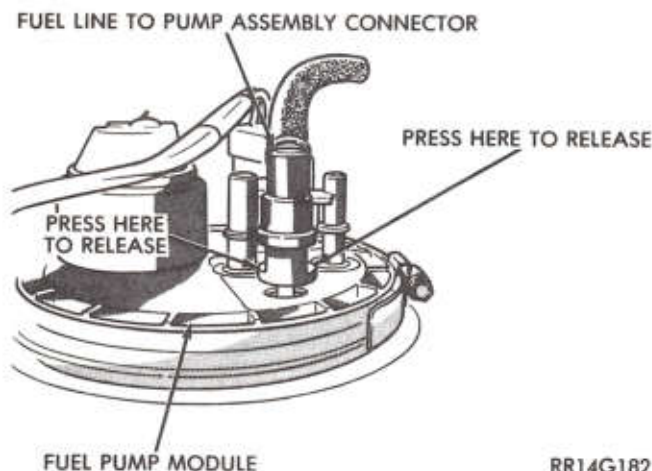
Fuel Hose Fitting on Fuel Pump Module
